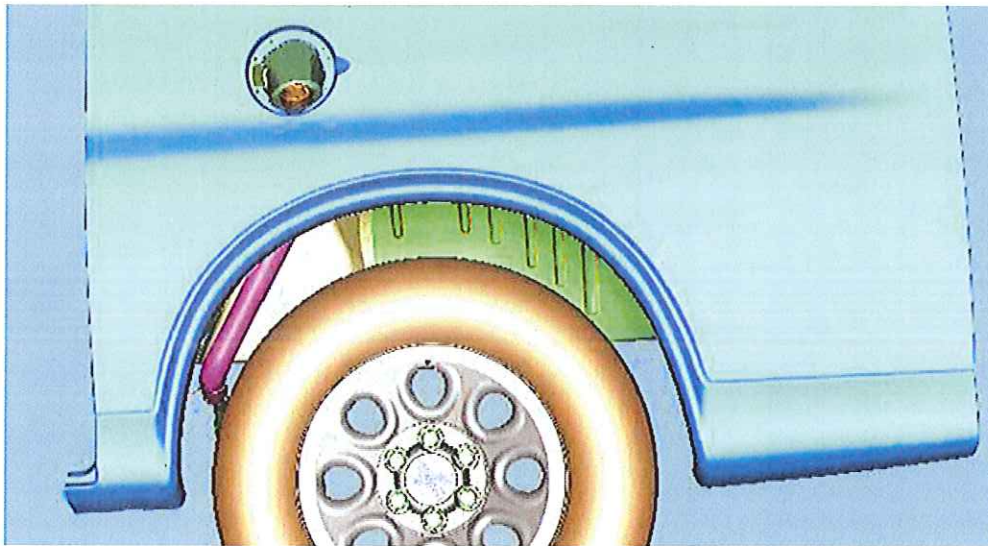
Fuel Filler Pipe Assembly as it appears in the inner wheel well opening
